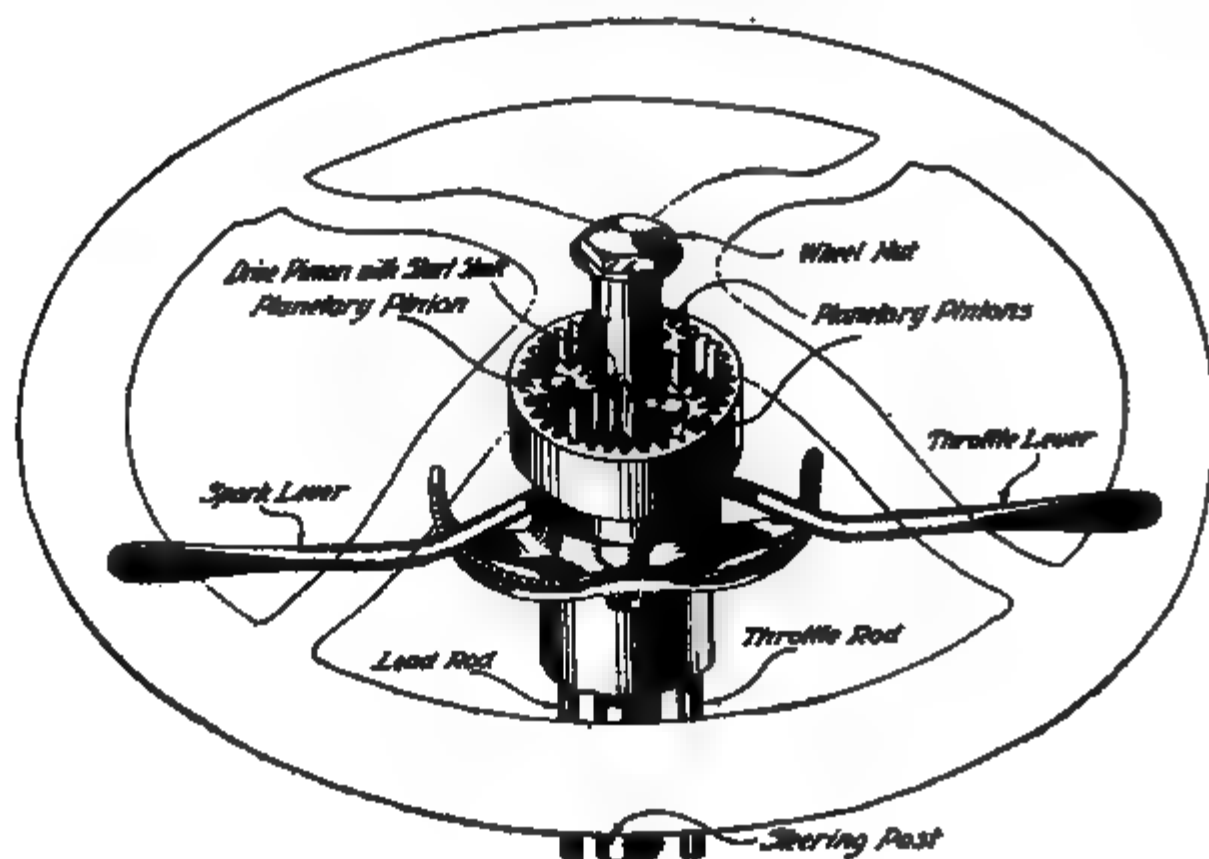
Ford Planetary Steering Gear—An Unconventional Type
